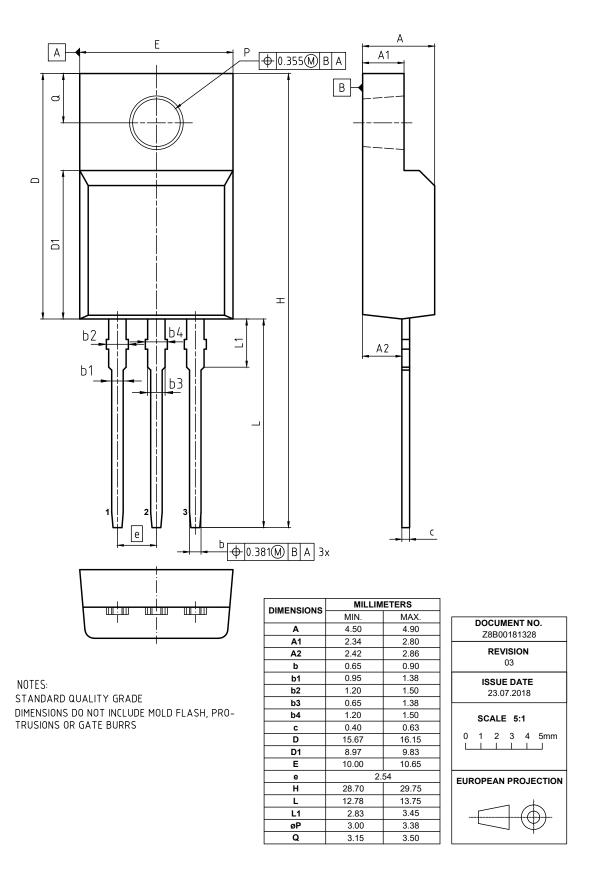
Outline PG-TO 220 FullPAK, dimensions in mm/inches
